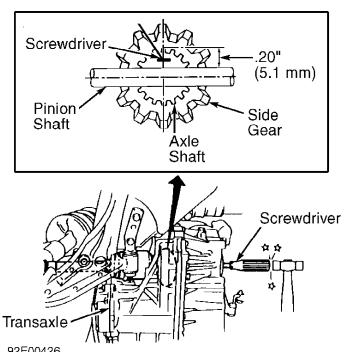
Removing Left Axle Shaft from Transaxle (A/T Models) Courtesy of Nissan Motor Co., U.S.A.
